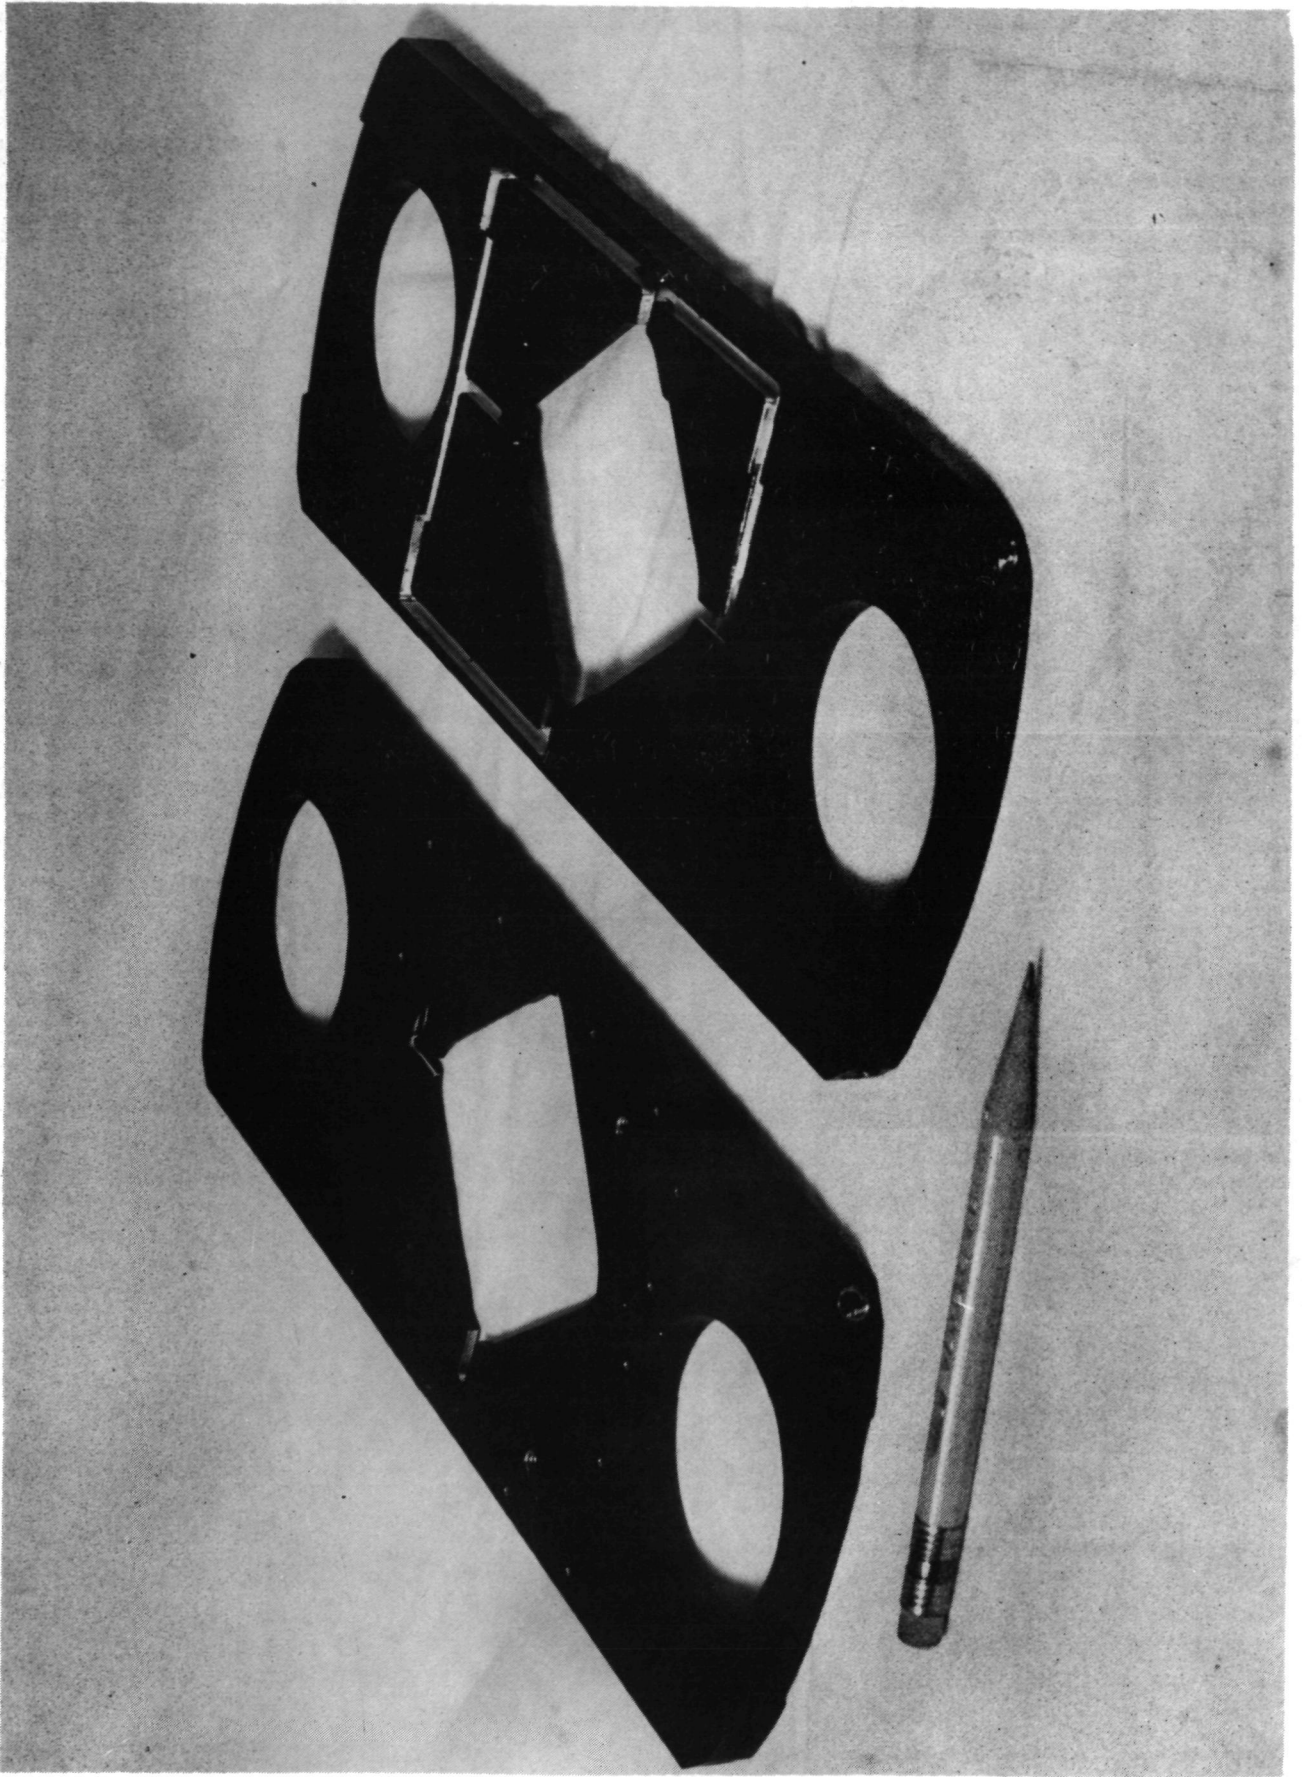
Armature Coil Carrier Plates (Front & Back Views)
